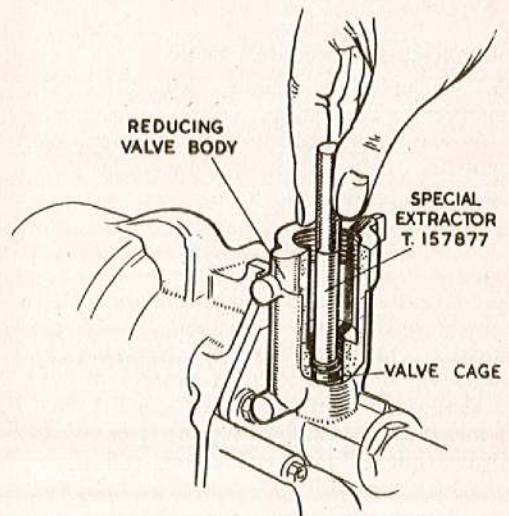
Use of special extractor T.157877 for removing and fitting cage
